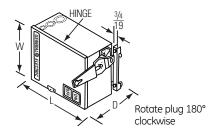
Door hinges at top.All dimensions are shown over largest part of plug.
